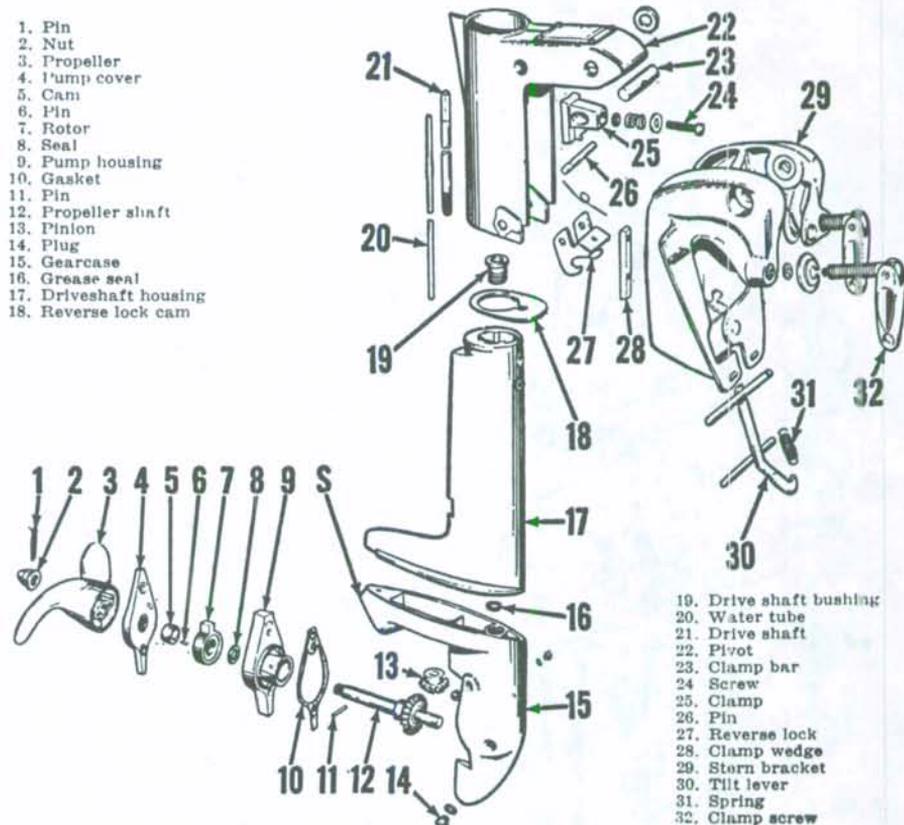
Exploded view of stern bracket and lower unit showing component parts.
